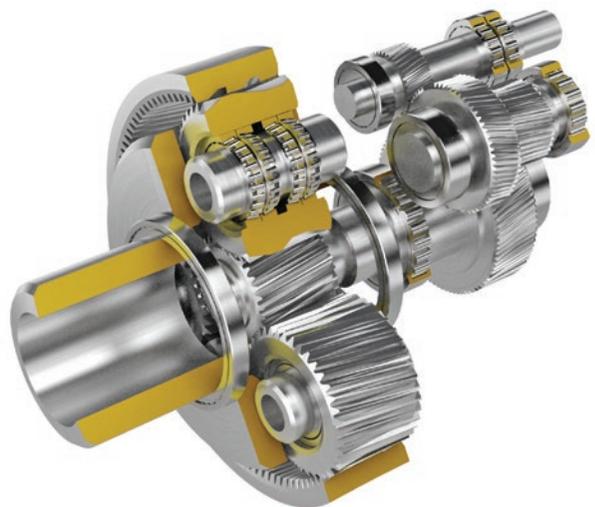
Gearing up: The turbine's generator is driven by the blades through a series of transmissions.
